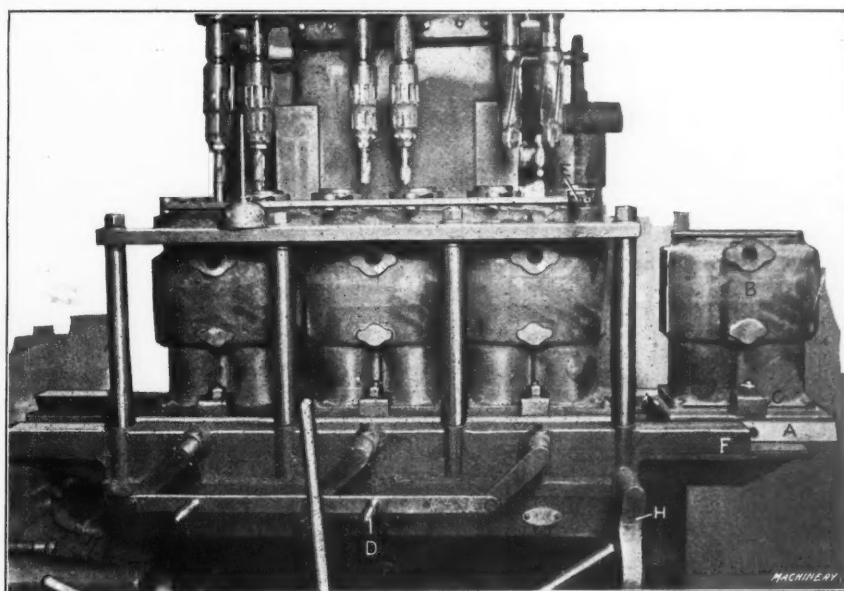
Close View of Progressive Type of Jig used in the Machine shown in Fig. 14
